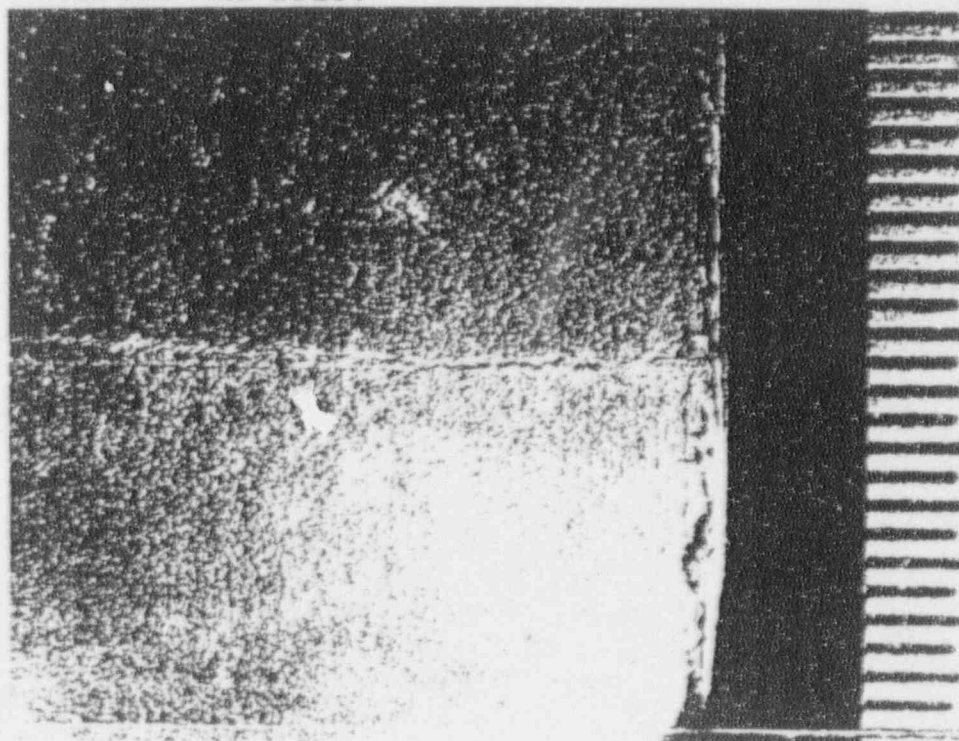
Detail of crack in shield after shield was removed. Solder is visible in crack. Scratch mark which crack followed is visible at left. Gauge - 1/64". Ma-2514.
